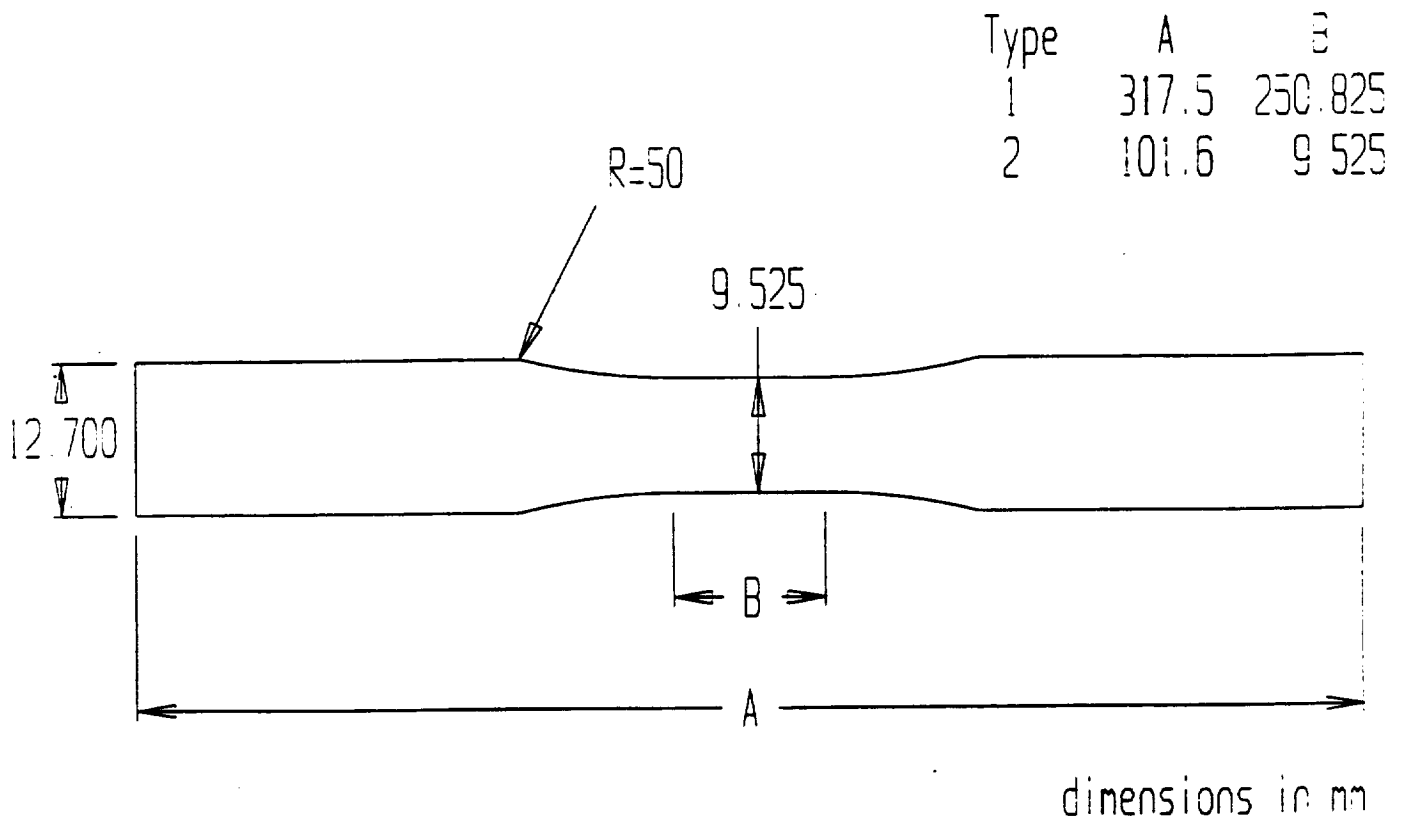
Reduced gauge section specimens used for tensile testing.
